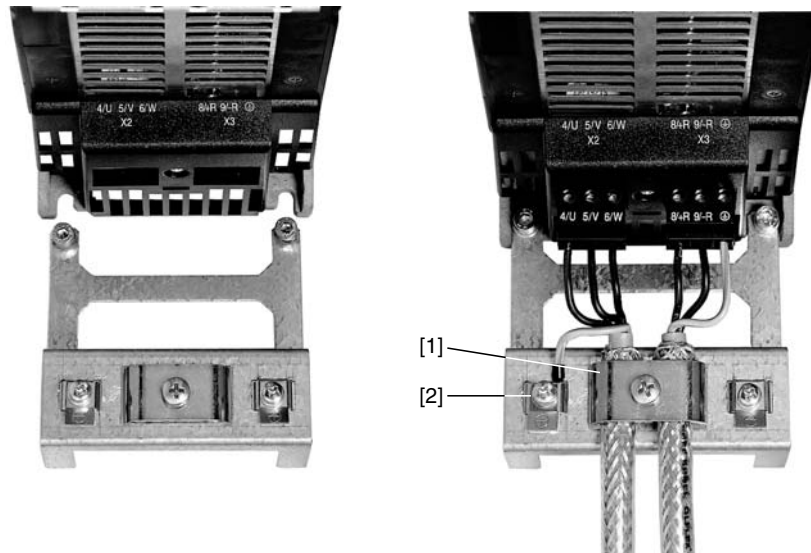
Attaching the shield clamp of the power section (MOVIDRIVE® compact size 1)
